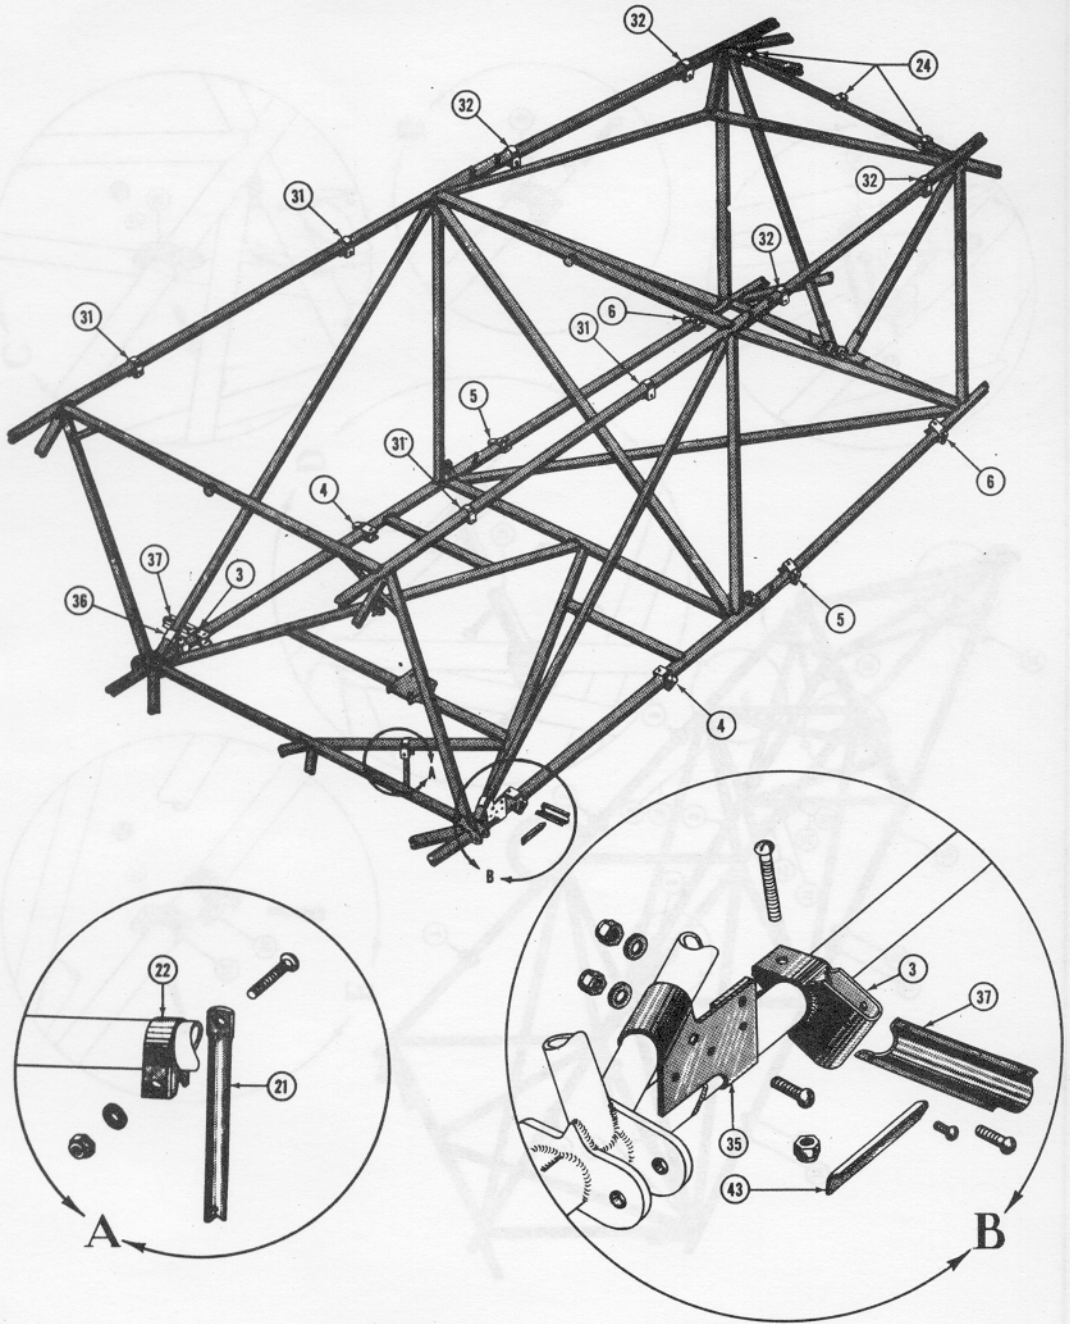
Fuselage Fairing and Covering Installation (Sheet 3 of 4 sheets)
